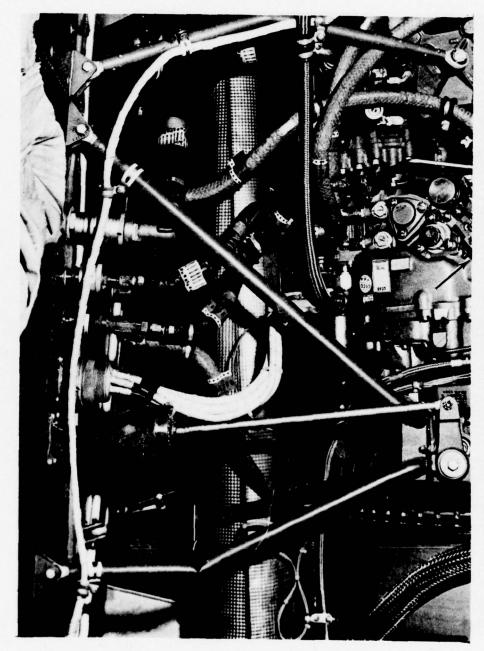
Photo H. Left Engine Deck, Deformed Engine Mount and Fuel Control.
